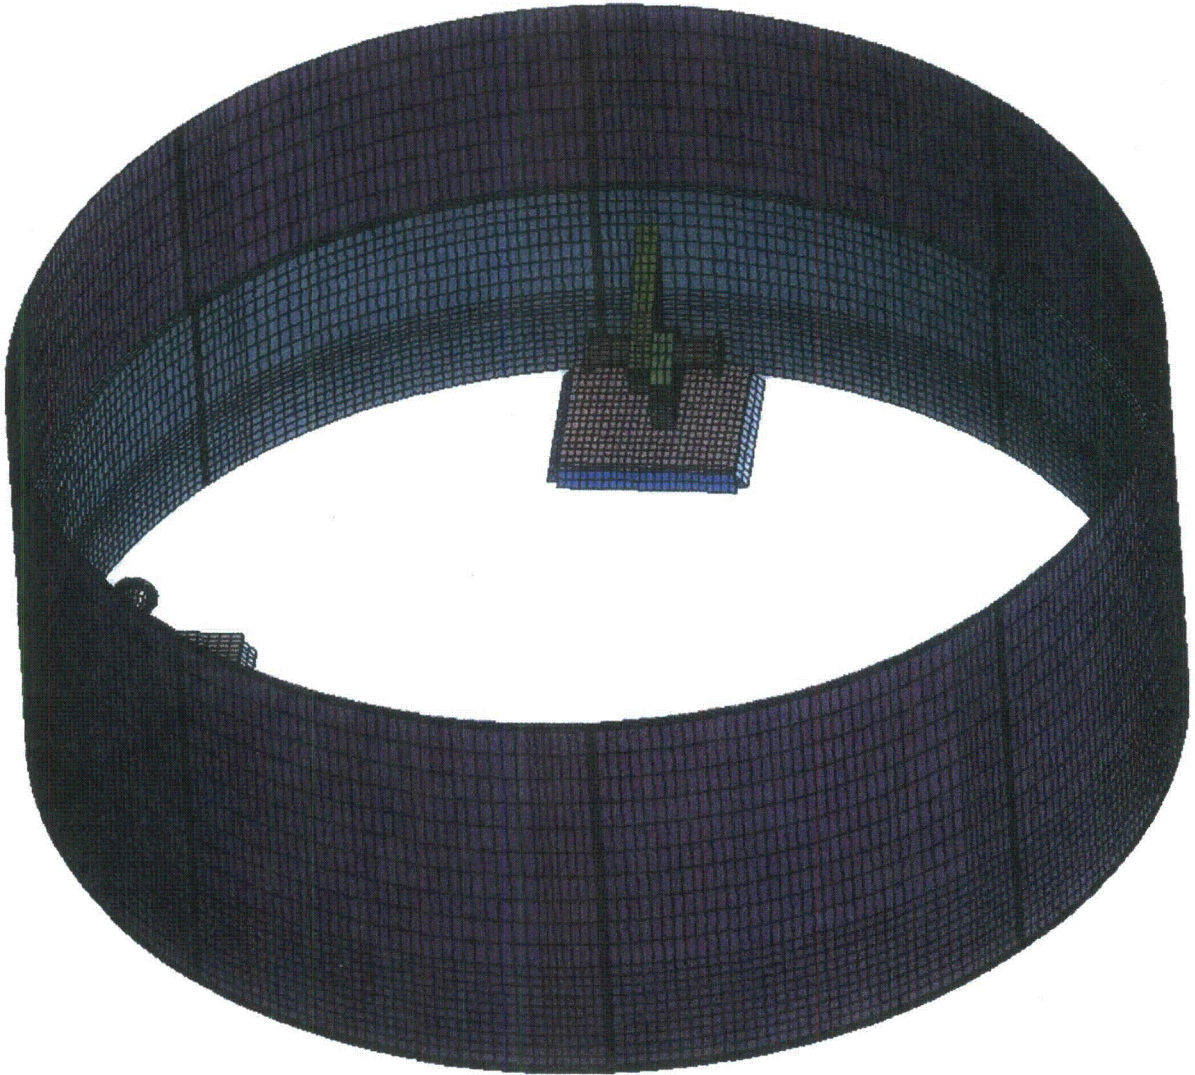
Impact Limiter Inner Shell, Lifting Ring, Attachment Lugs, Mounting Plates, Welds and Attachment Pins; Meshed
